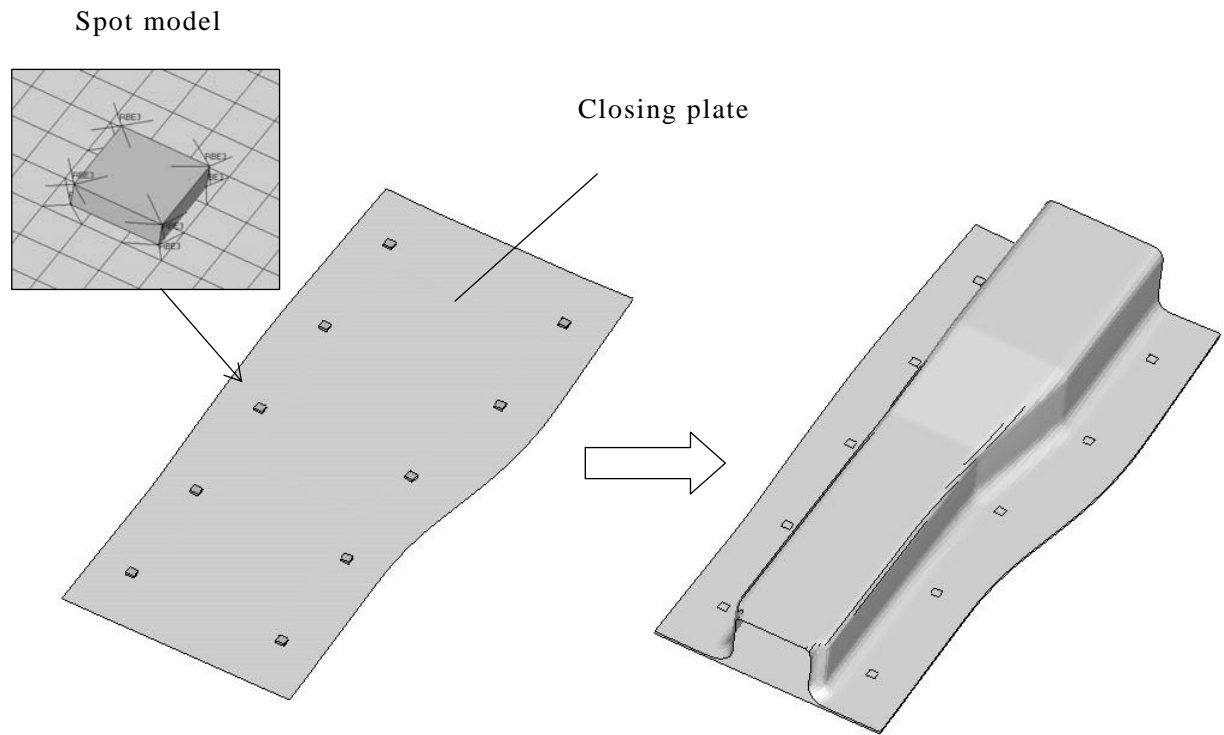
Model of spot welded rectangular-shaped section member
